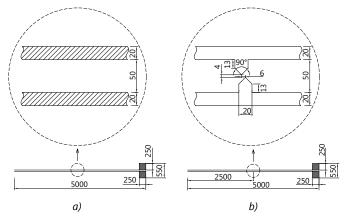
Microstip antena drawings: (a) emitter, (b) detector (all dimensions are in micrometers)
